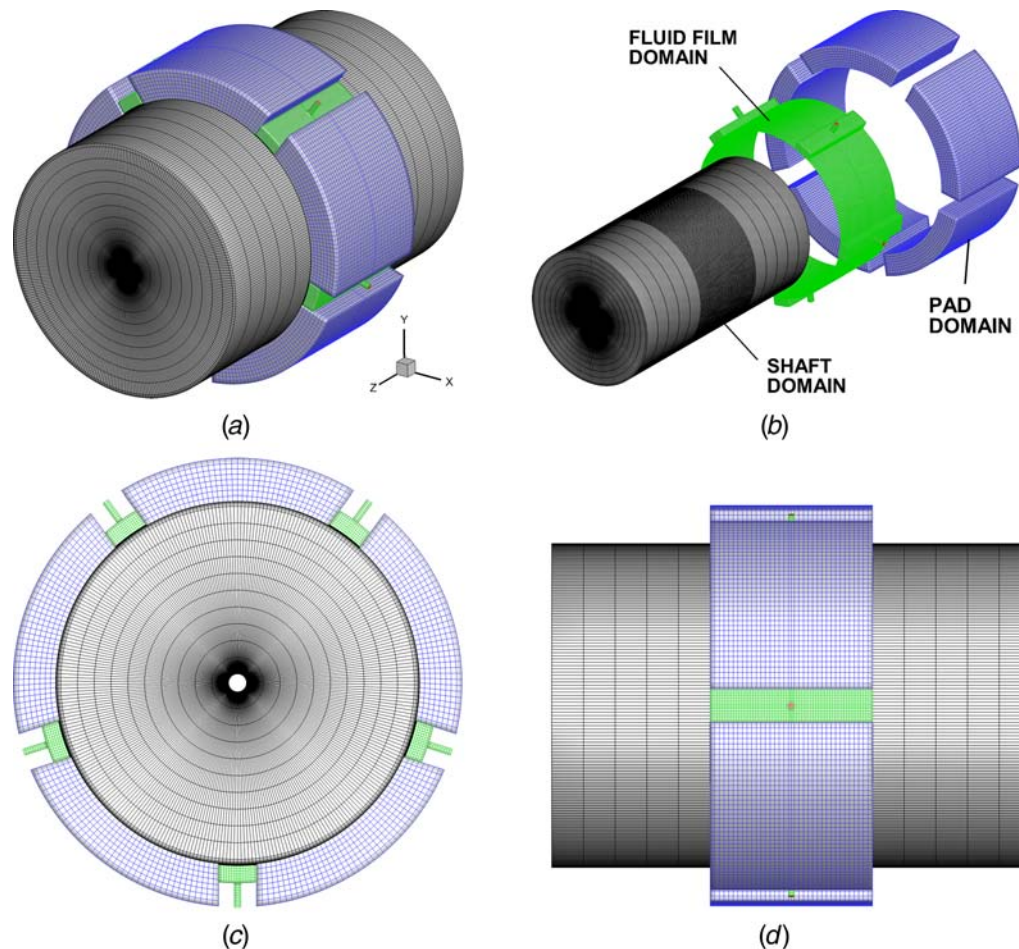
Geometry and mesh of example TPJB: (a) overview (427,558 elements), (b) exploded view (scaled factor; shaft 0.7, fluid-film 0.9), (c) x-y view, and (d) x-z view
